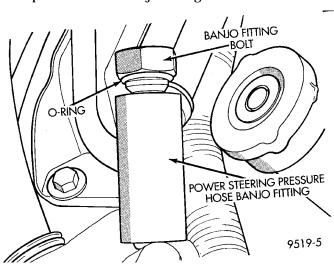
O-Ring Installed On Banjo Fitting Bolt
